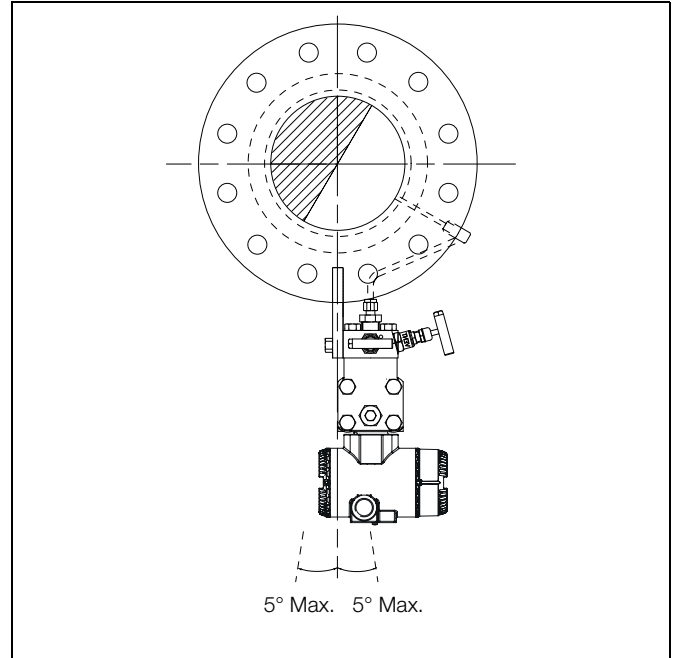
Horizontal Pipe Mounting – Liquids
